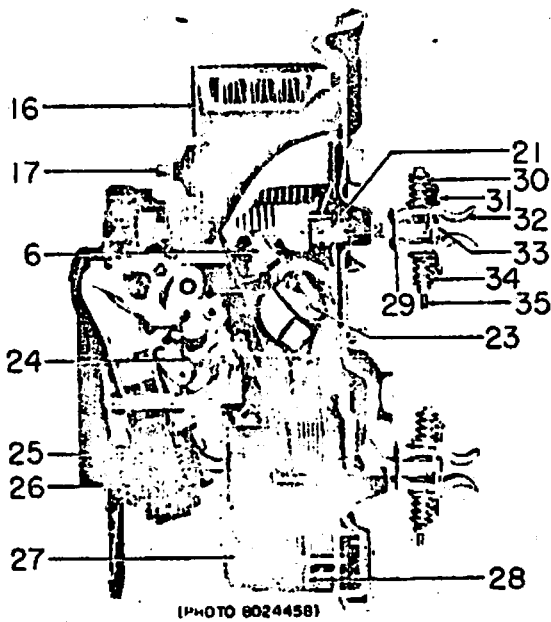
Cutaway view of type AK-2-25 electrically operated power circuit breaker
